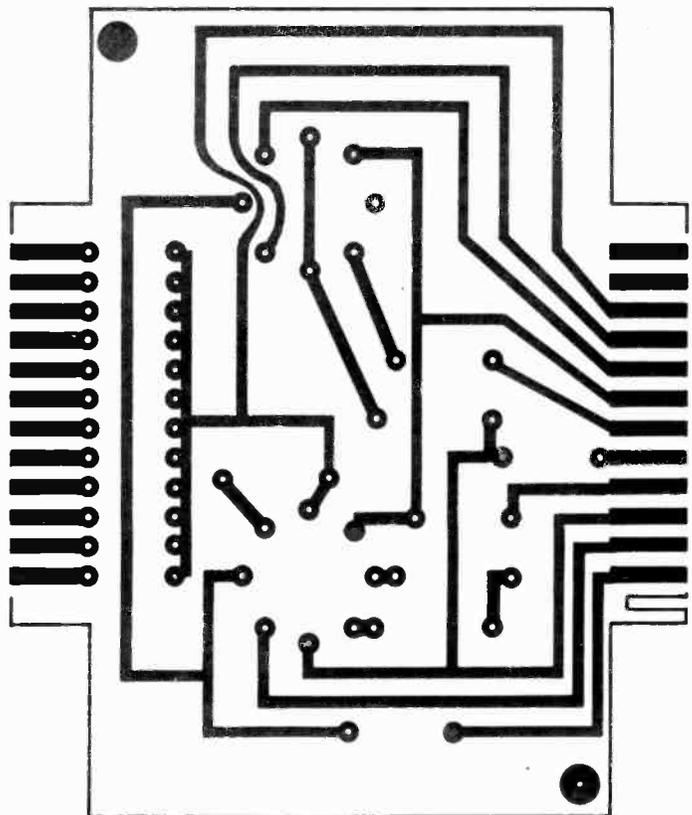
A printed circuit layout for the circuit of Fig. 1 showing the use of two edge connectors so that all ranging resistors can be board mounted
